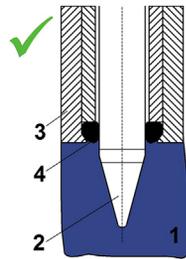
In the product area (1), a sensor (2) can be installed via a weld-in adapter (3) and a hygienic process connection sandwich into the pipeline. The detachable seal joint (e.g. O-ring, 4) is almost completely enclosed with the surrounding metal protecting the non-product side from the product contact area (Lelieveld et al., 2003; Hauser et al., 2007).
